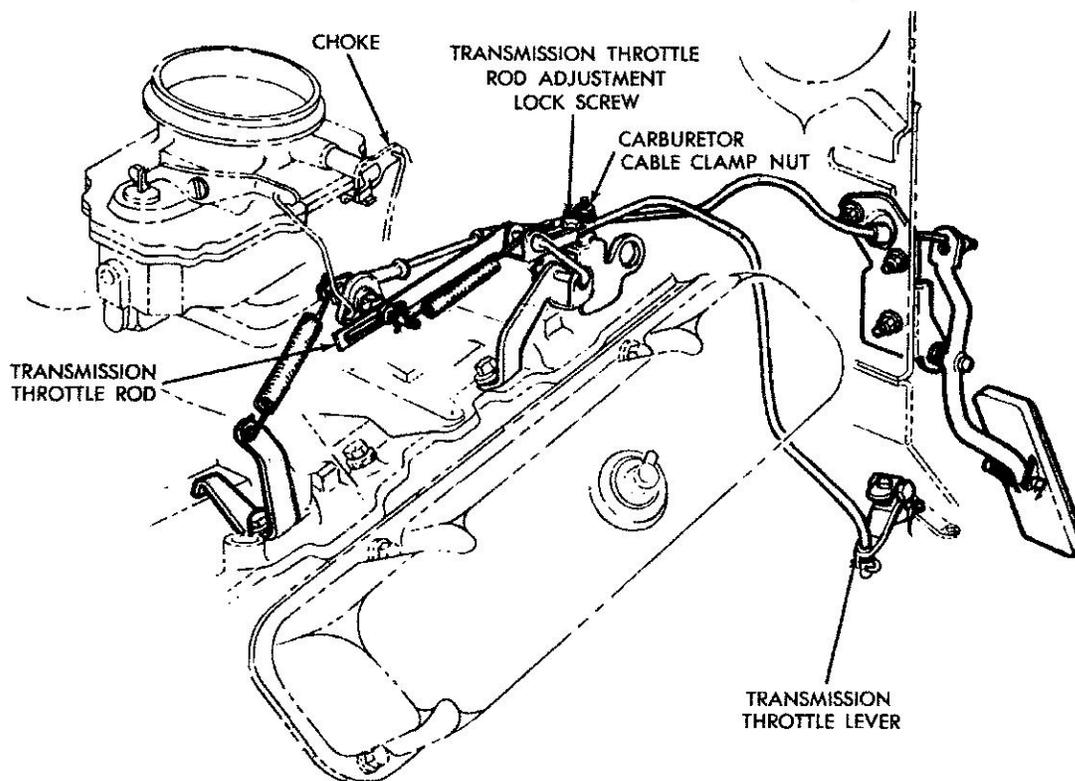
Throttle Rod Adjustment (8 Cylinder Models with Single Section Throttle Rod)
